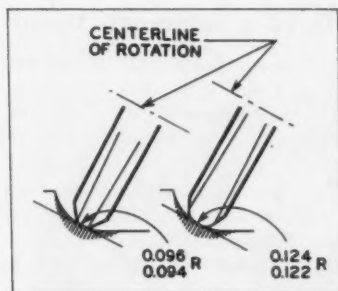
Different cross-sectional radii on roller circumference cause rolls to work fillet evenly and prevent tool marks
